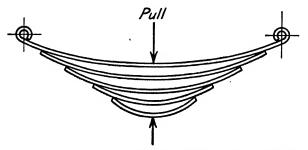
NIPPED SPRING PLATES BEFORE BEING CLAMPED
